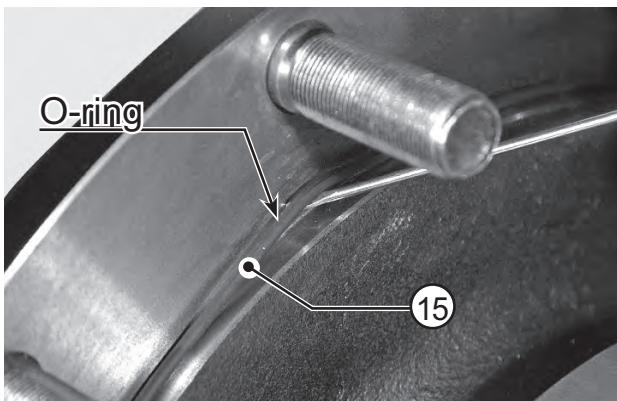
Replace the o-ring (15). Lubricate the o-ring before fitting.
